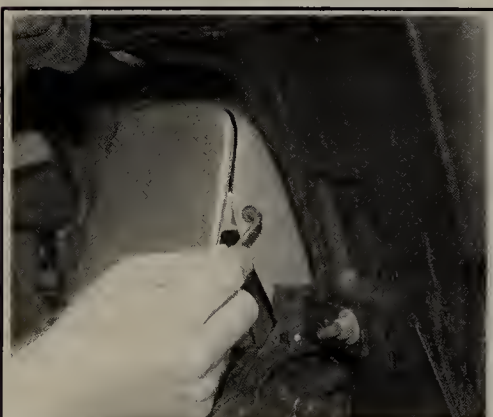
You must then remove the screws from the inner side of the bezel/trim piece
